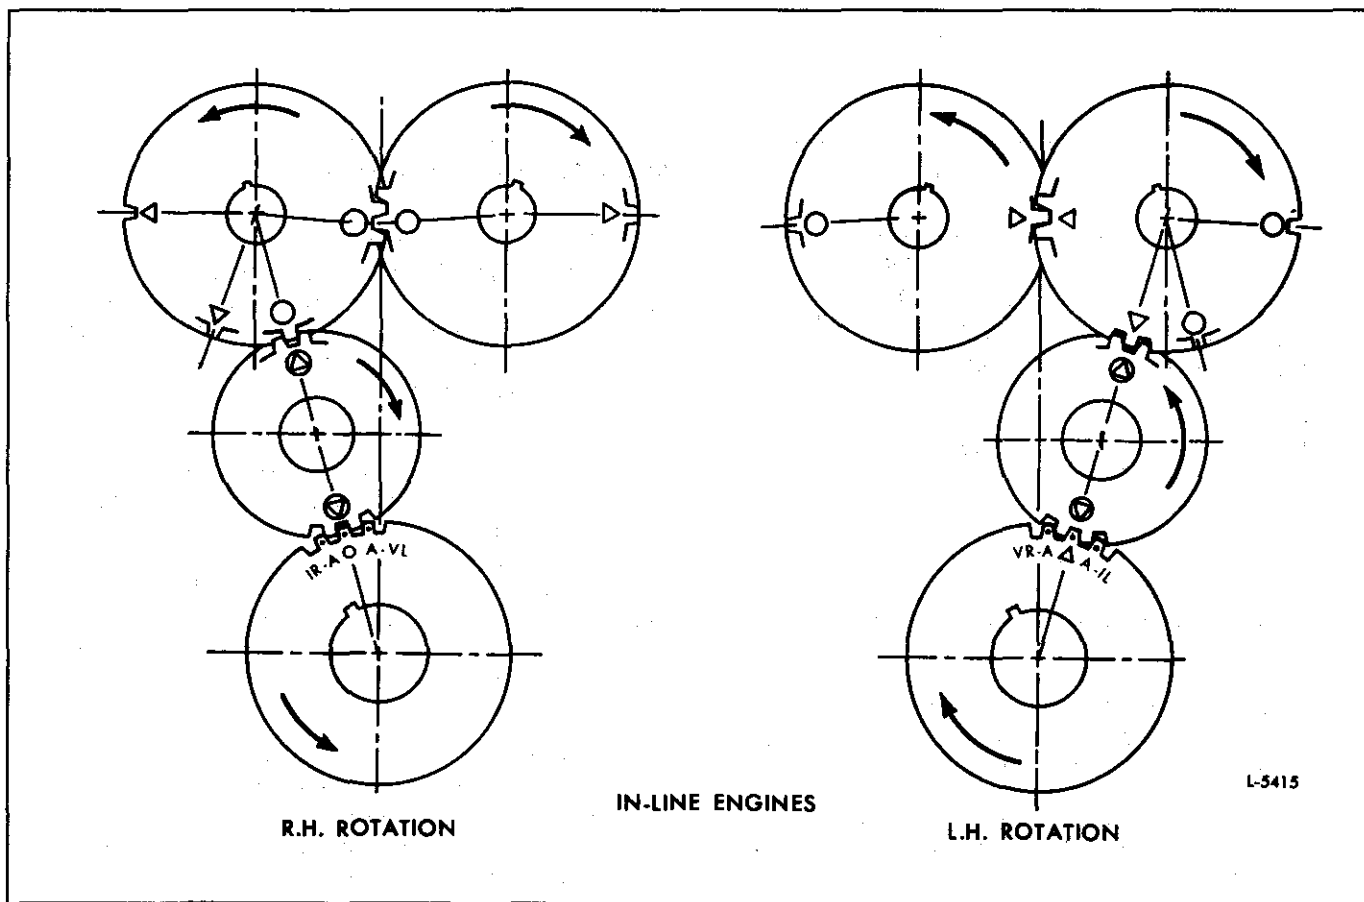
In-Line Engine Gear Train Timing Mark (Standard Timing Shown)
